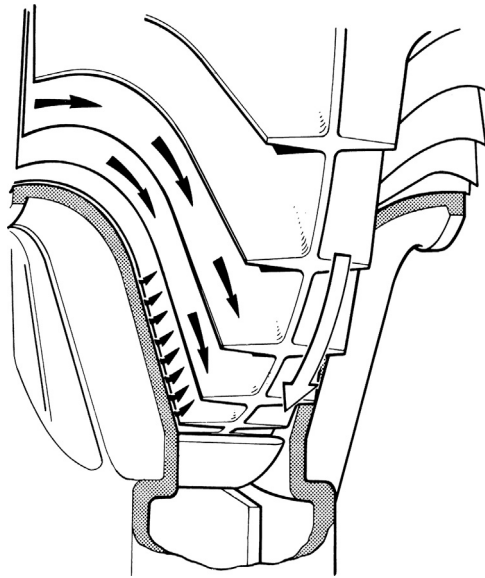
Impeller working clearance and air leakage. (Source: Rolls Royce.)
